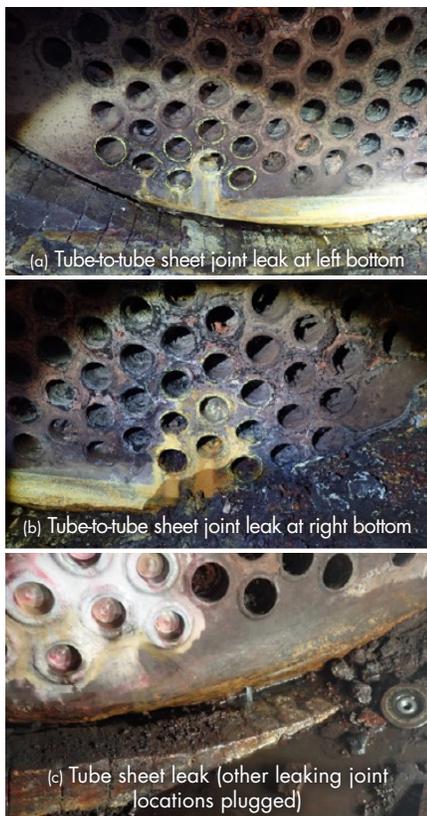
Tube-to-tube sheet joint failures and tube sheet leak
